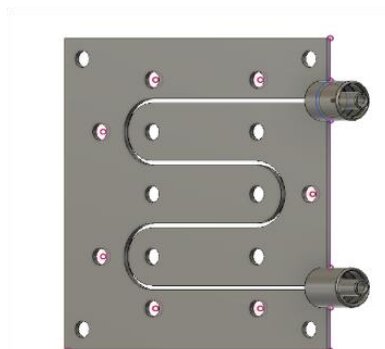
CAD image of the third prototype investigated. This prototype had Luer locks and many screw ports.
